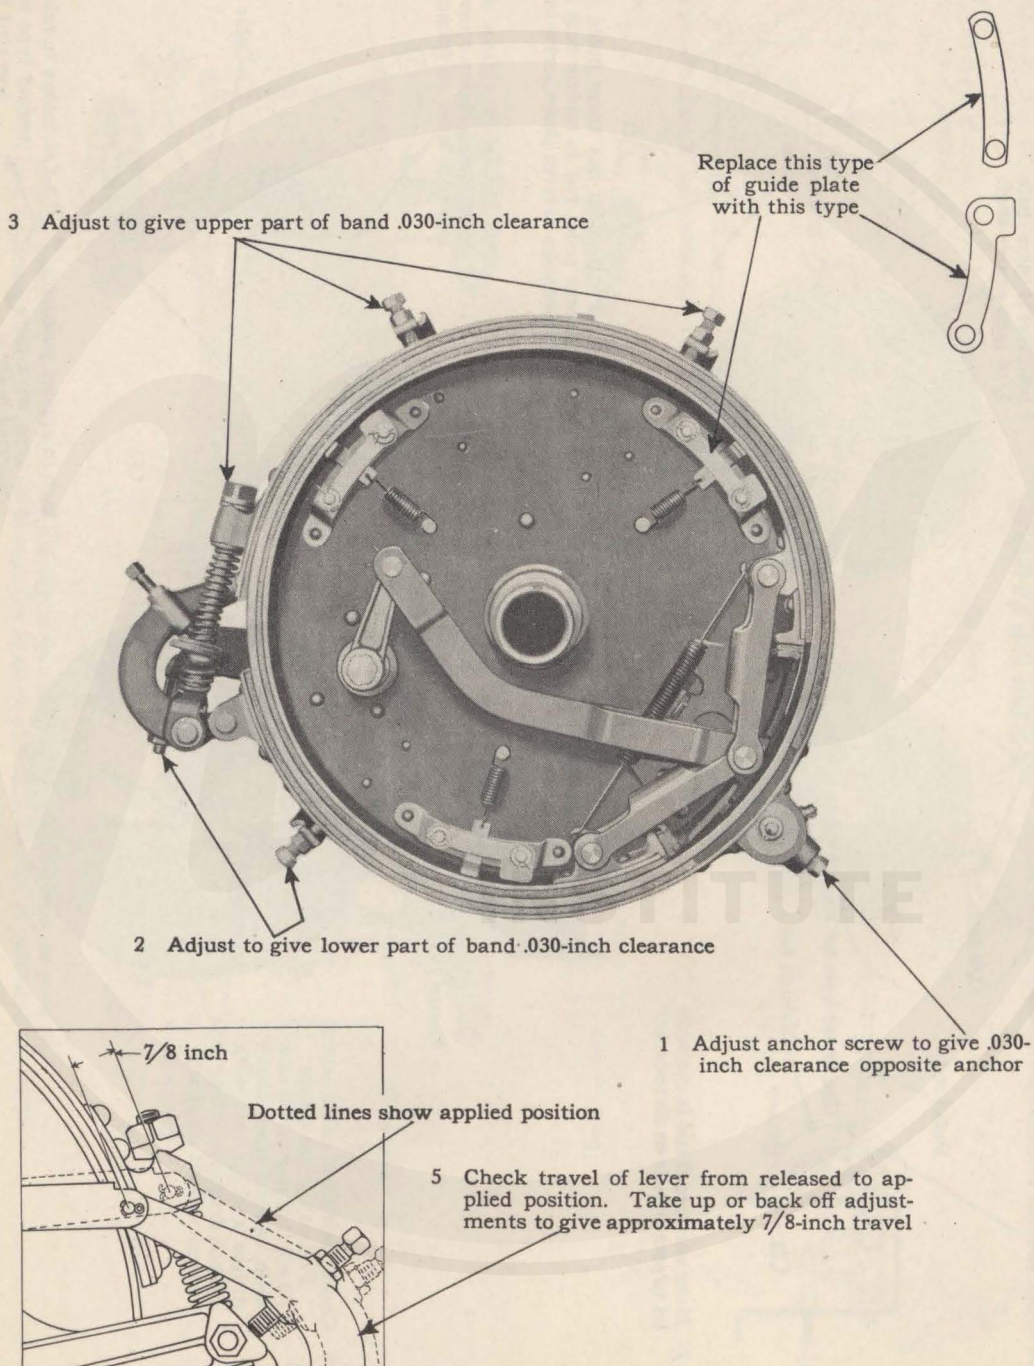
Adjustment of Cadillac 341-A rear foot brakes.
